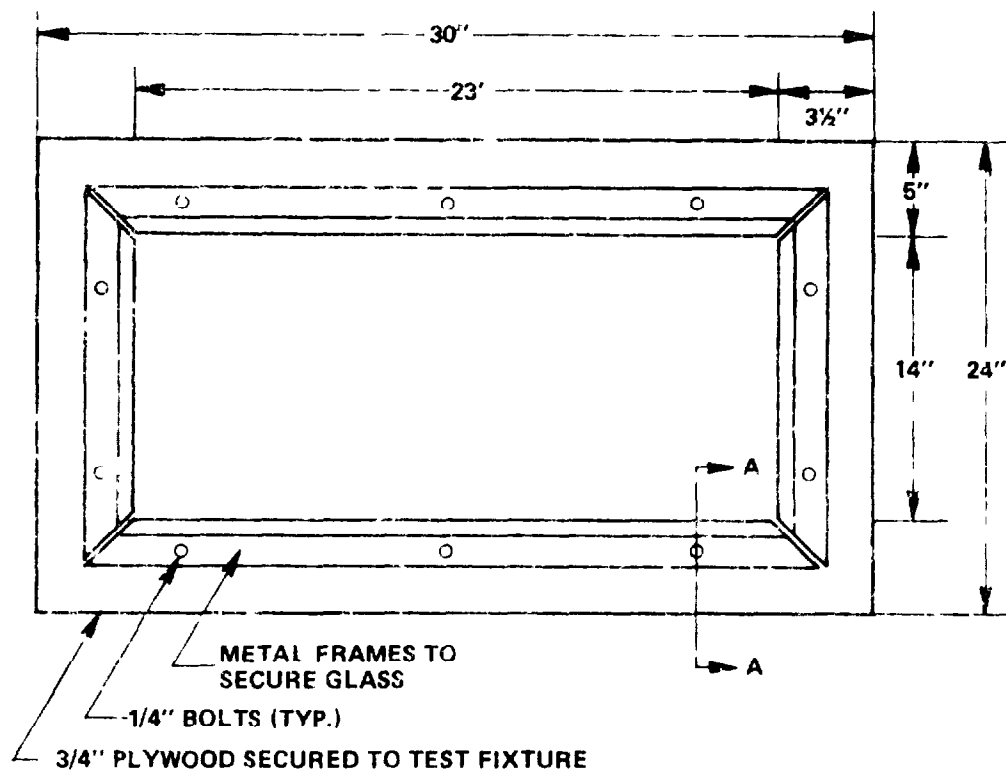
DESIGN OF GLASS FRAME STRUCTURE AND IMPACT TEST FIXTURE
